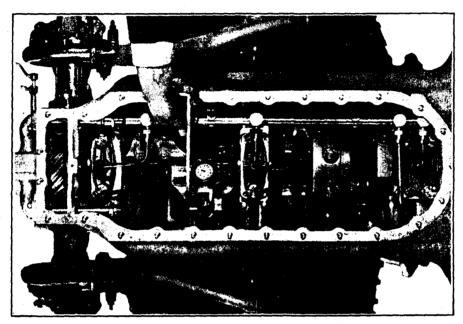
Indicator 196-B, Holder 67870, and Prying Bar 57736 for Crankpin Bearings
